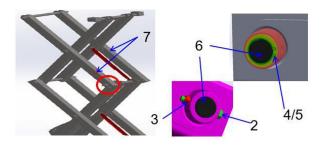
Installation of fourth layer fork 2. Bolt 3. Nut 4. Washer 5. Retaining ring 6. Pin 7. Fifth outer arm assembly
